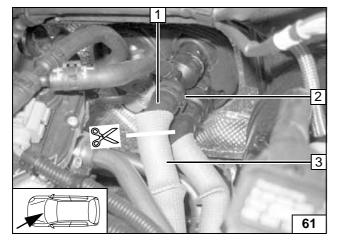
FSI. Technical design of coolant connection is identical for 1.6MPI. Loosely mount bolt 3.
